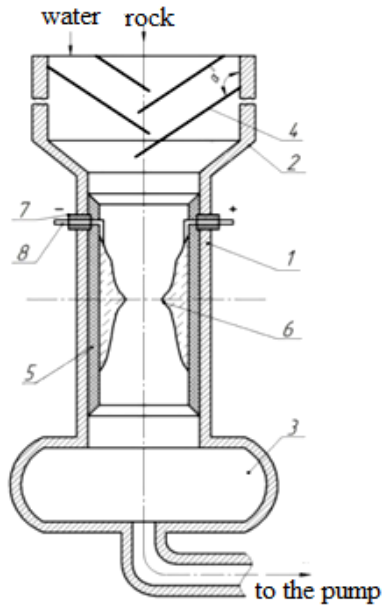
Cross section of electrohydraulic crusher: 1 - cylindrical housing; 2 - boot device; 3 - hopper; 4 - fixed adjustable blinds; 5 - a glass; 6 - bit electrodes; 7 - insulators; 8 - conductors
